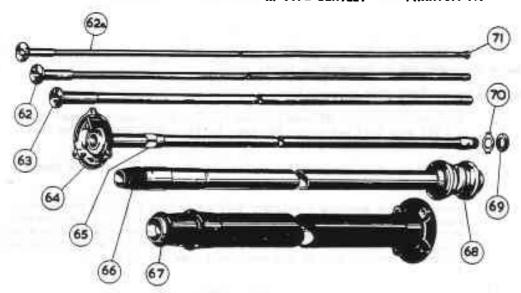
STEERING COLUMN, "EXPLODED" VIEW.
